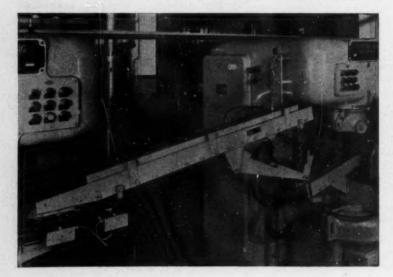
Work-handling equipment between two of the Churchill Red Ring gear shaving machines
